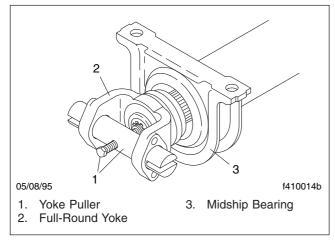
, Remove a Full-Round End-Yoke from a Coupling Shaft
